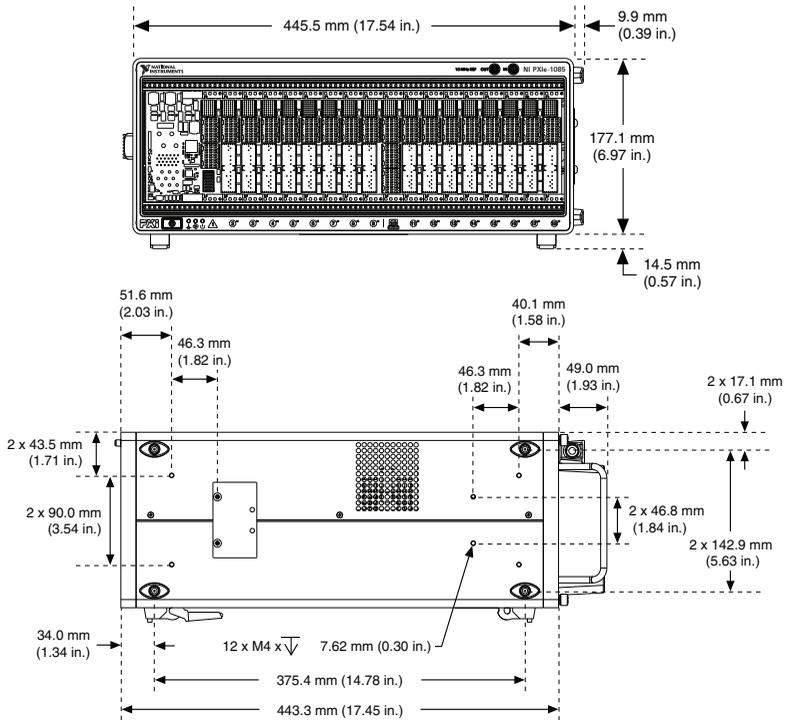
NI PXIe-1085 Series Chassis Dimensions (Bottom)
